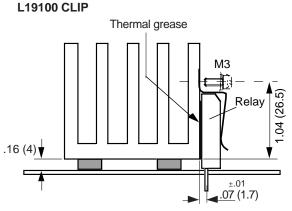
Mounting with L19100 clip; dimensions in inches (mm)
